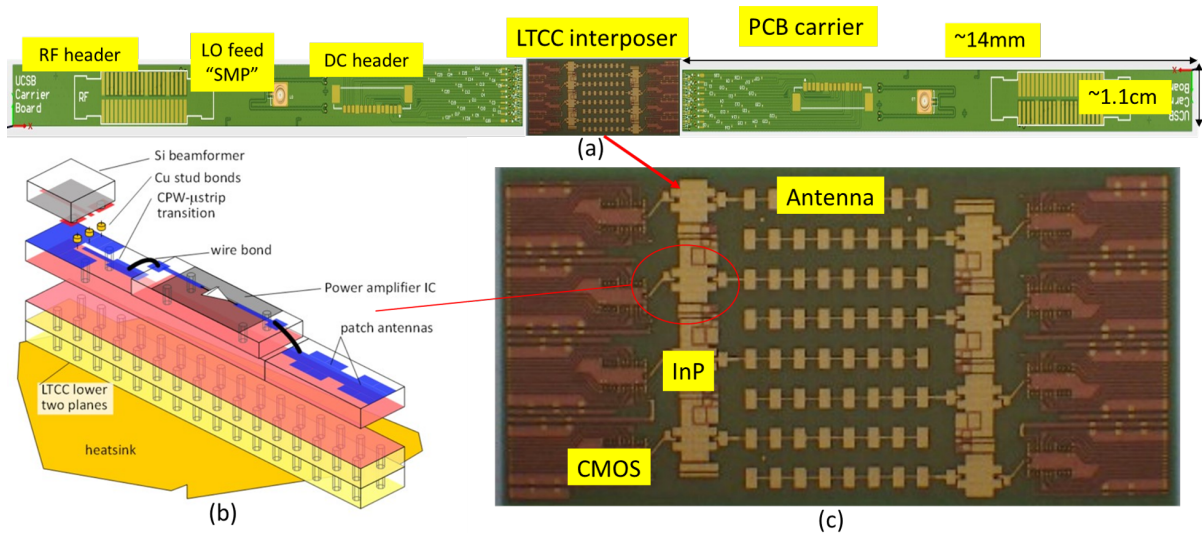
a) Photos for the high-power transmitter module (CMOS with InP PAs) showing the LTCC ceramic interposer and PCB carrier board. b) Cartoon drawing for the CMOS transmitter and InP chips to the interposer showing the different type of transitions. c) Close look on the LTCC ceramic interposer showing the antenna arrays and InP and CMOS chips footprints.
